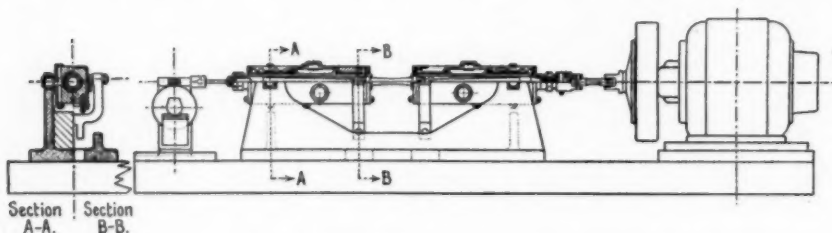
Short Specimen Plain Bearing Rotating Beam Fatigue Machine.
